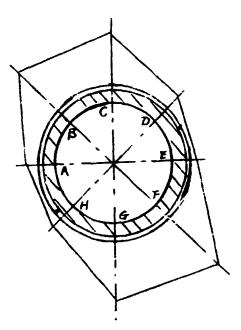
The tangential prestress of the inner shell caused by the shrinkage of longitudinal weldings of the layer plate.
